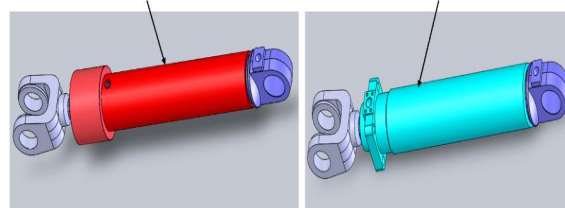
Hydraulic-Cylinder Assembly Before and After Variation
